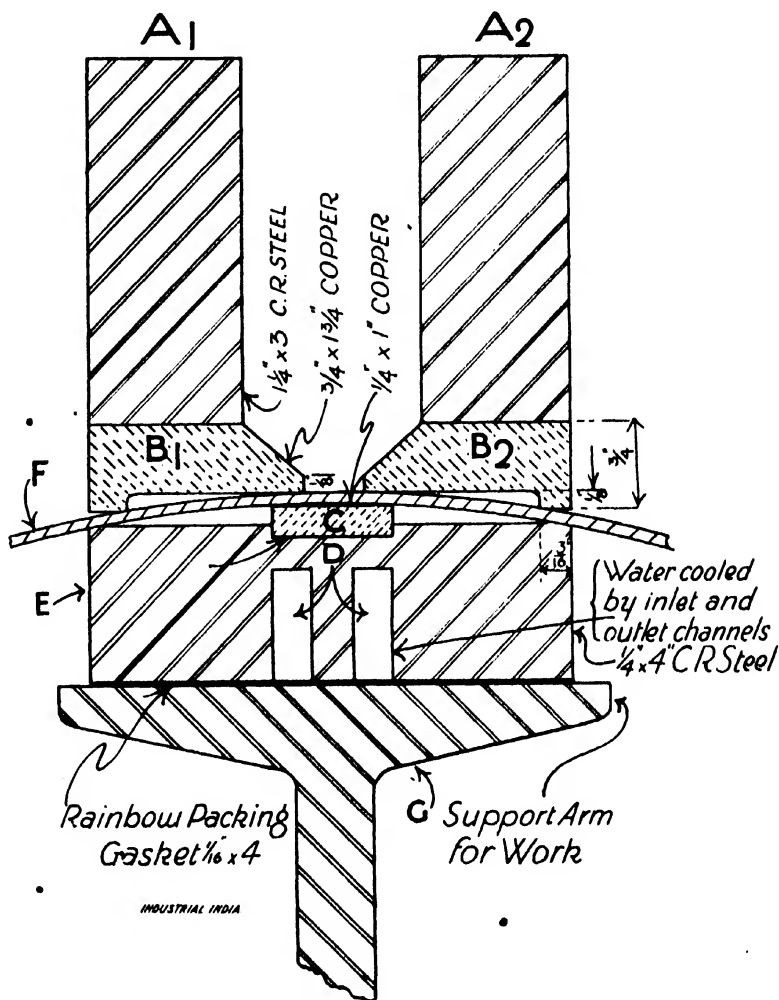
End View—Clamping Arrangement for Longitudinal Seams. For use with Automatic Welder
